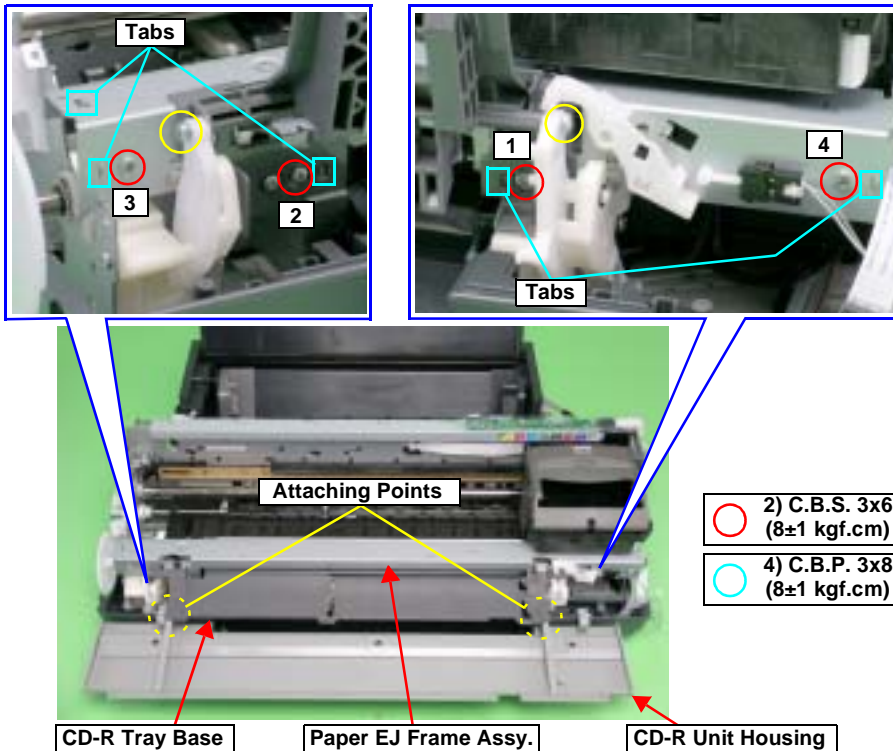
Screws that Secure the Paper EJ Frame Assy
